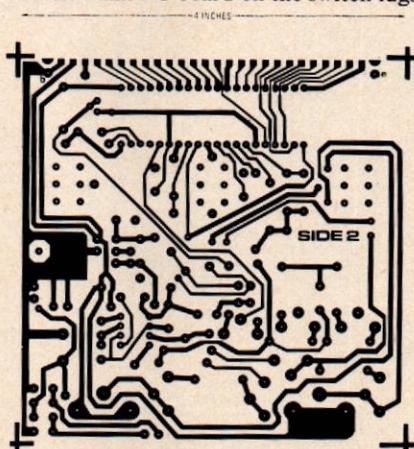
PATTERN for side-2 of the board. Only a few parts are mounted on this side.
